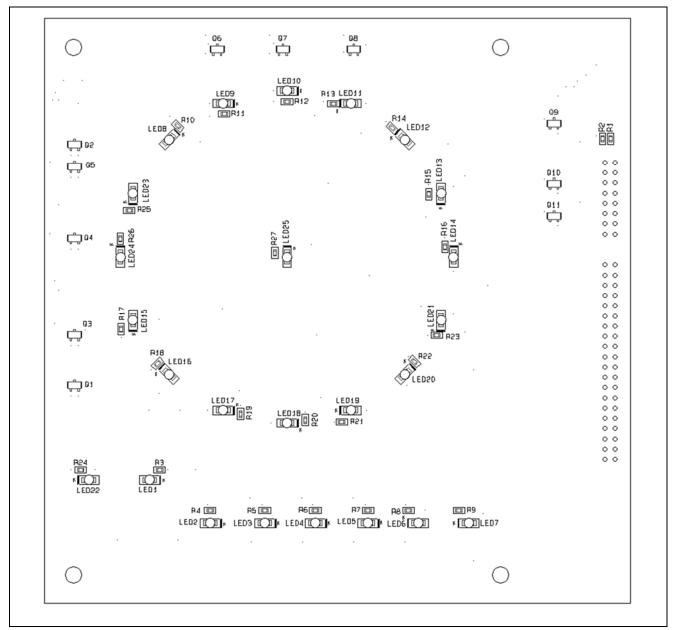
Application Board Component Placement (bottom/soldered side)
